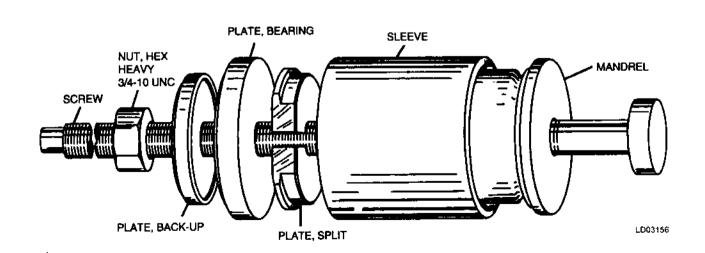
BEARING REMOVAL TOOL (PART NO. 364-37260-000)
